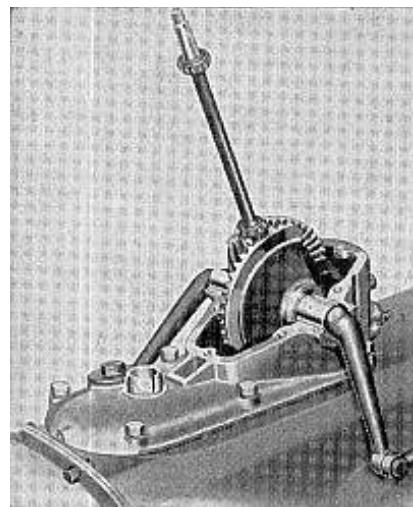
Models 2N-9N steering gear with upper housing removed.
